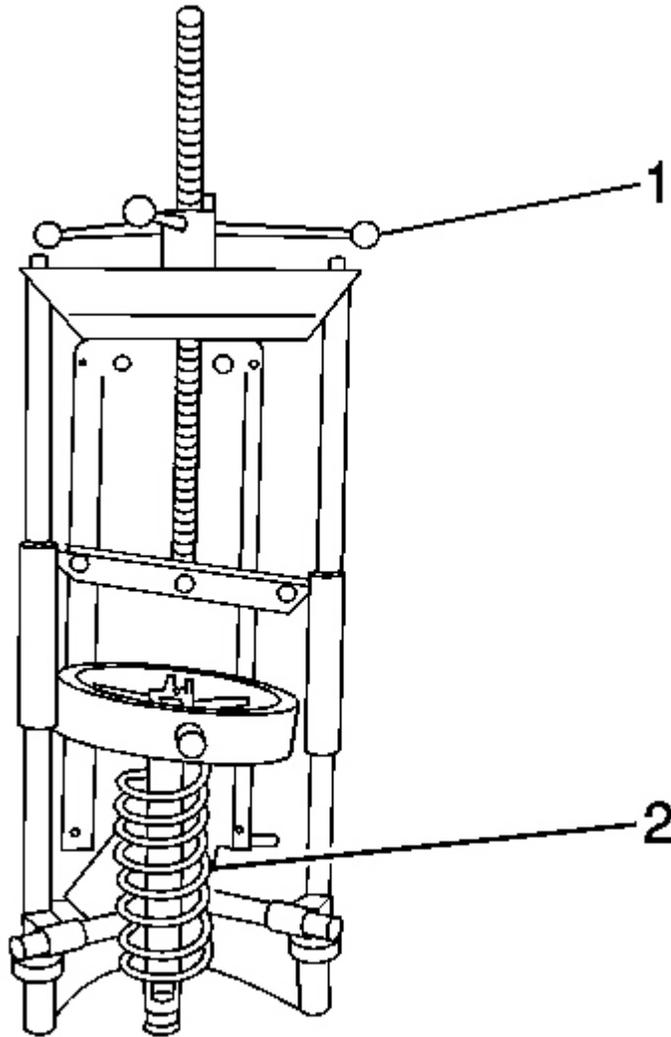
View Of Compressor Forcing Screw & Coil Spring
